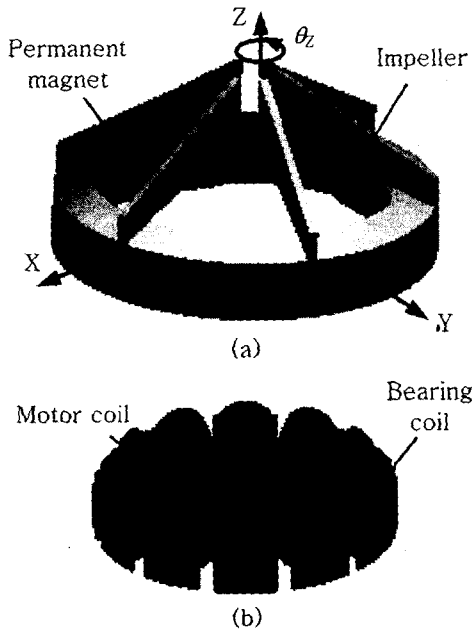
(a) The ring-shape outer rotor with impellers and (b) the stator with coils
